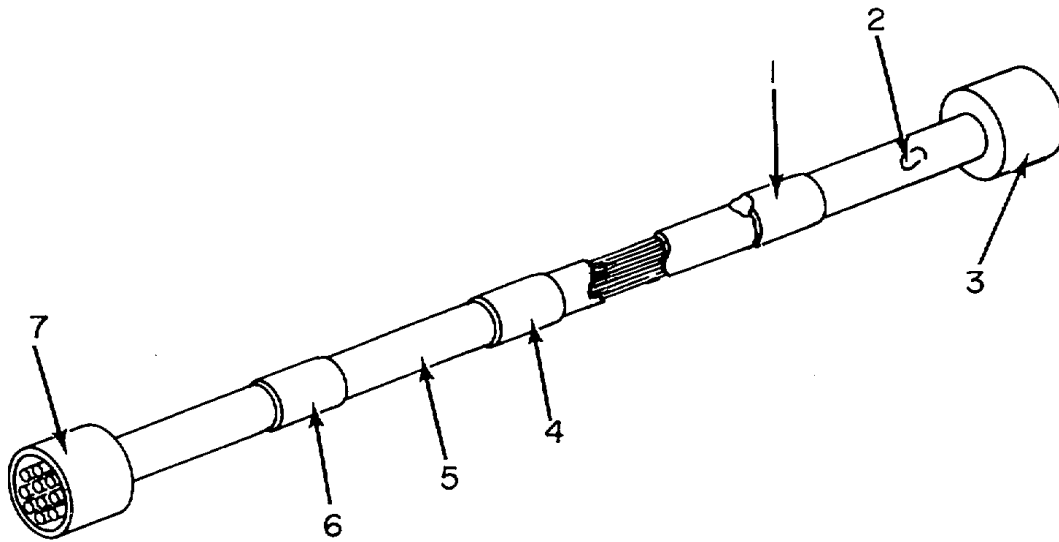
Cable Assembly, Special Purpose, Electrical CX-12504/ASM-417 (W-10).
